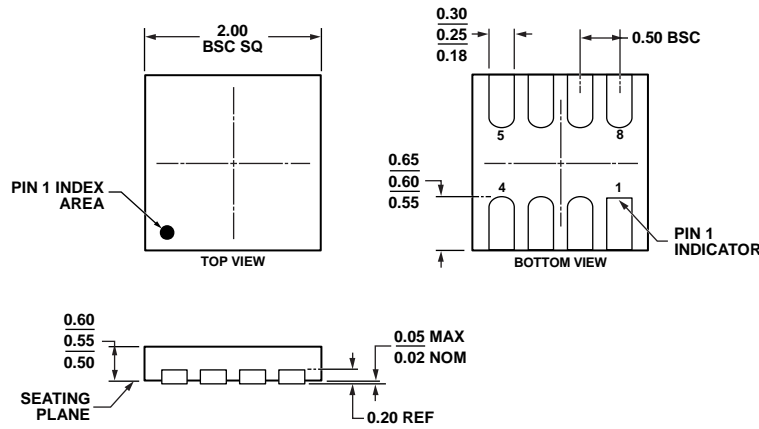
8-Lead Lead Frame Chip Scale Package [LFCSF_WD]
